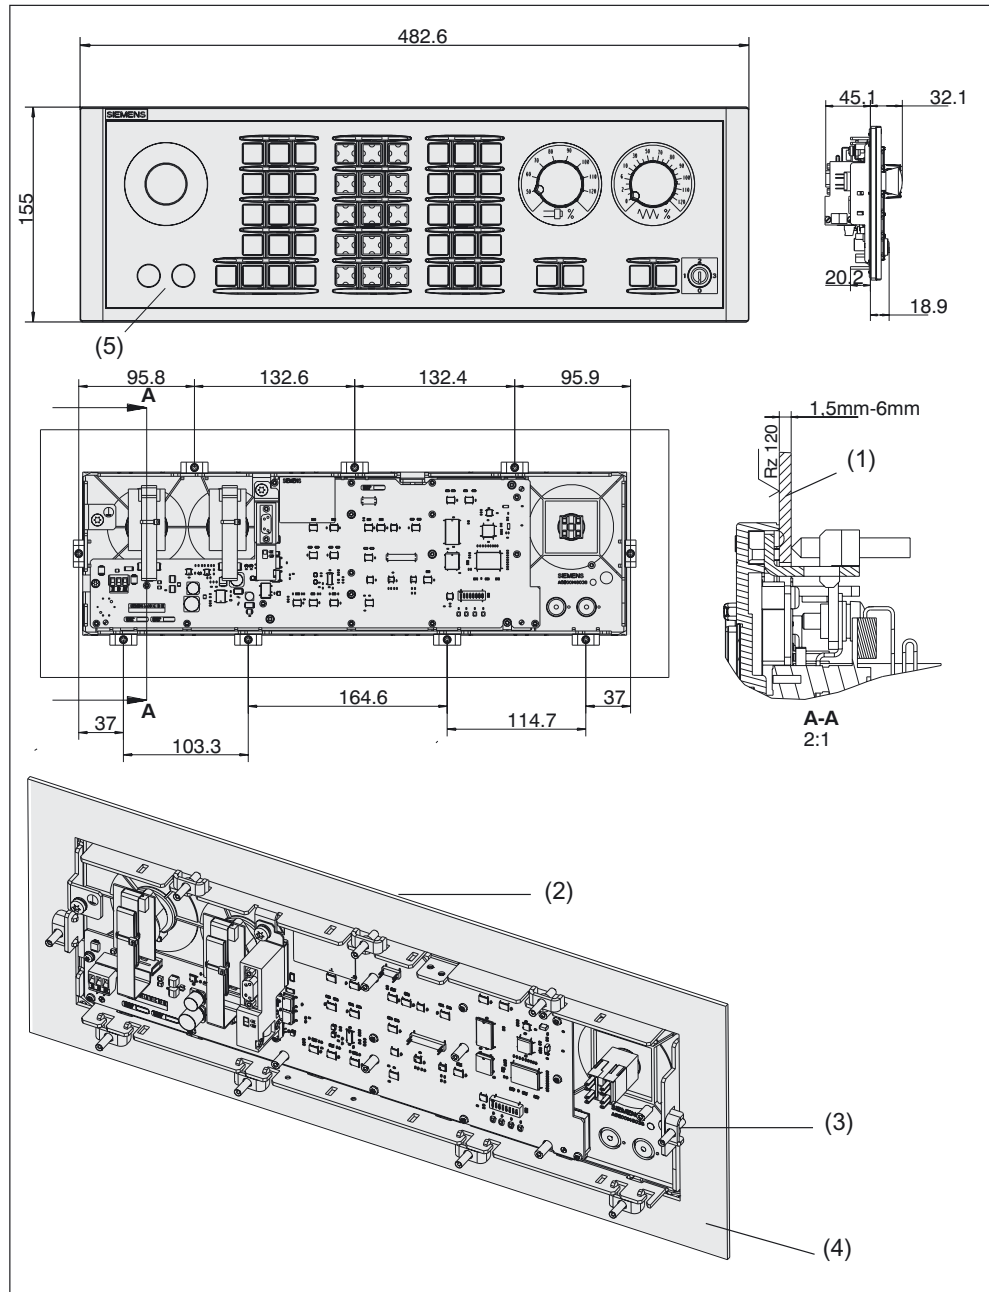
Dimension drawing for machine control panel MCP 483C
